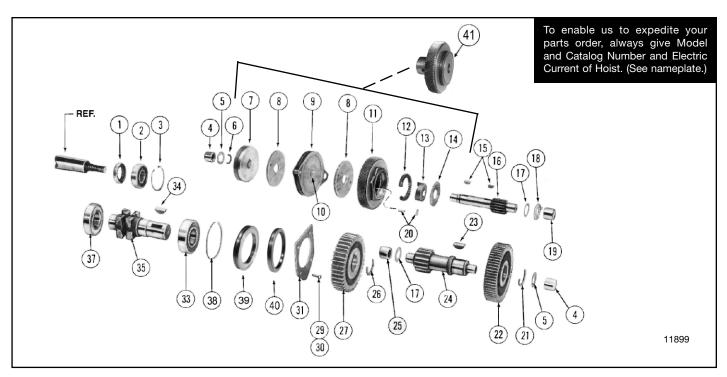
GEARING AND LOAD BRAKE PARTS (1 thru 3 Ton Hoists)
